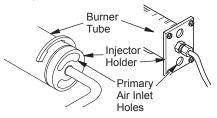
Injector Holder On Outlet Burner Tube (Burner will vary by model)
